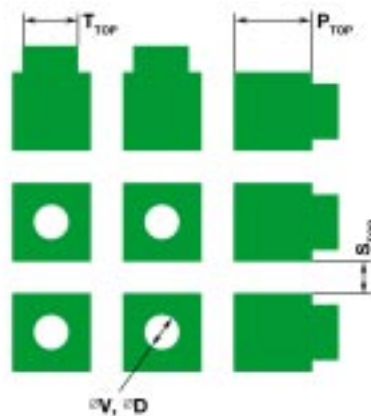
Typical conductor pads on top layer of burn-in board. Note square shape. The labels are for dimensions provided in the referenced documentation.
